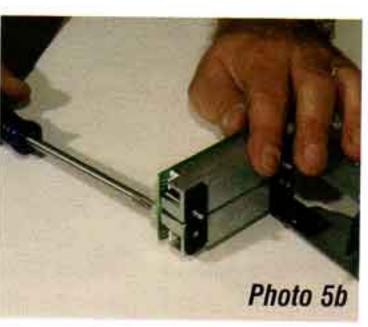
& 5h: The two remaining switch assemblies attach to the bottom of the panel just like the two previous ones. Additionally, there is a set of metal pushrods that engage the original vertical control levers and the new slider switches. Install the switch assemblies with the #8 x 1-1/4" self-tapping screws and nylon cupped washers provided. Do not overtighten. Make sure the loop ends of the metal pushrods engage the control levers on the panel. Secure these pushrods to the levers with the original screw, nylon spacer and small flat washer provided. Secure the rear of the switch assemblies with the small flat bracket and #8 x 1-1/4" self-tapping screws and cupped nylon washers provided.
